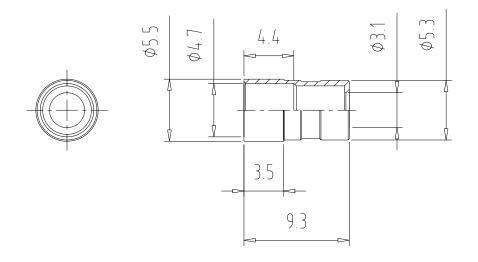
③-2 Crimping Ring (for ø 3 mm cord)
